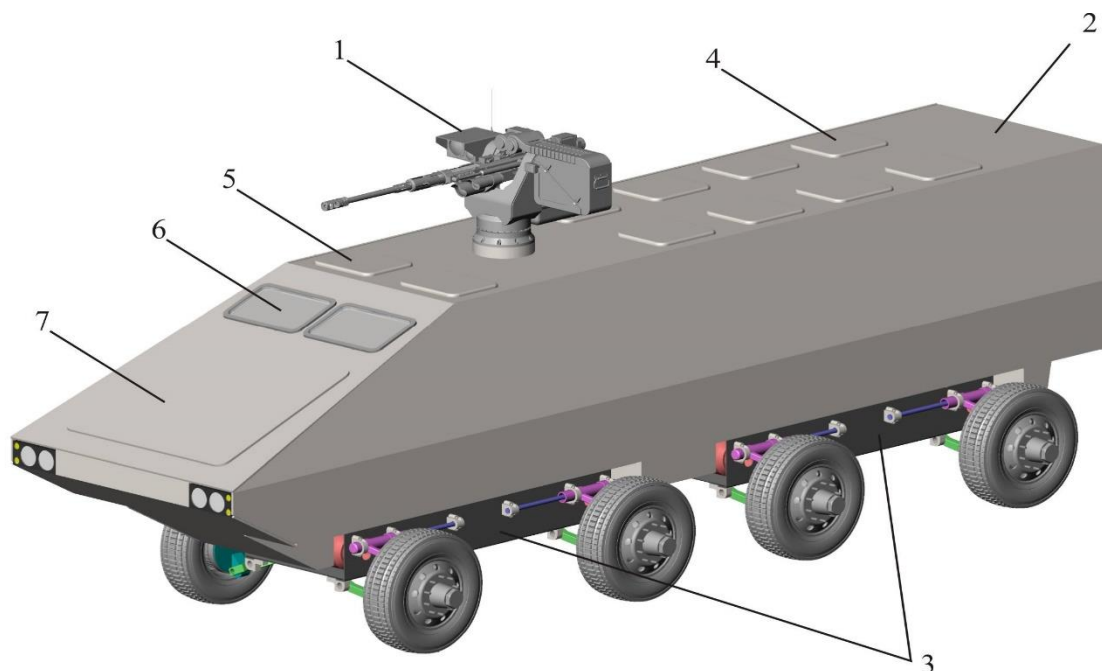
External 3D view of the four-axis BKM: 1 – combat module; 2 – armored hull; 3 – electromechanical all-wheel drive rotary platform with torsion independent suspension; 4 – rear hatches; 5 – front hatches; 6 – armored windows; 7 – engine compartment hatch
